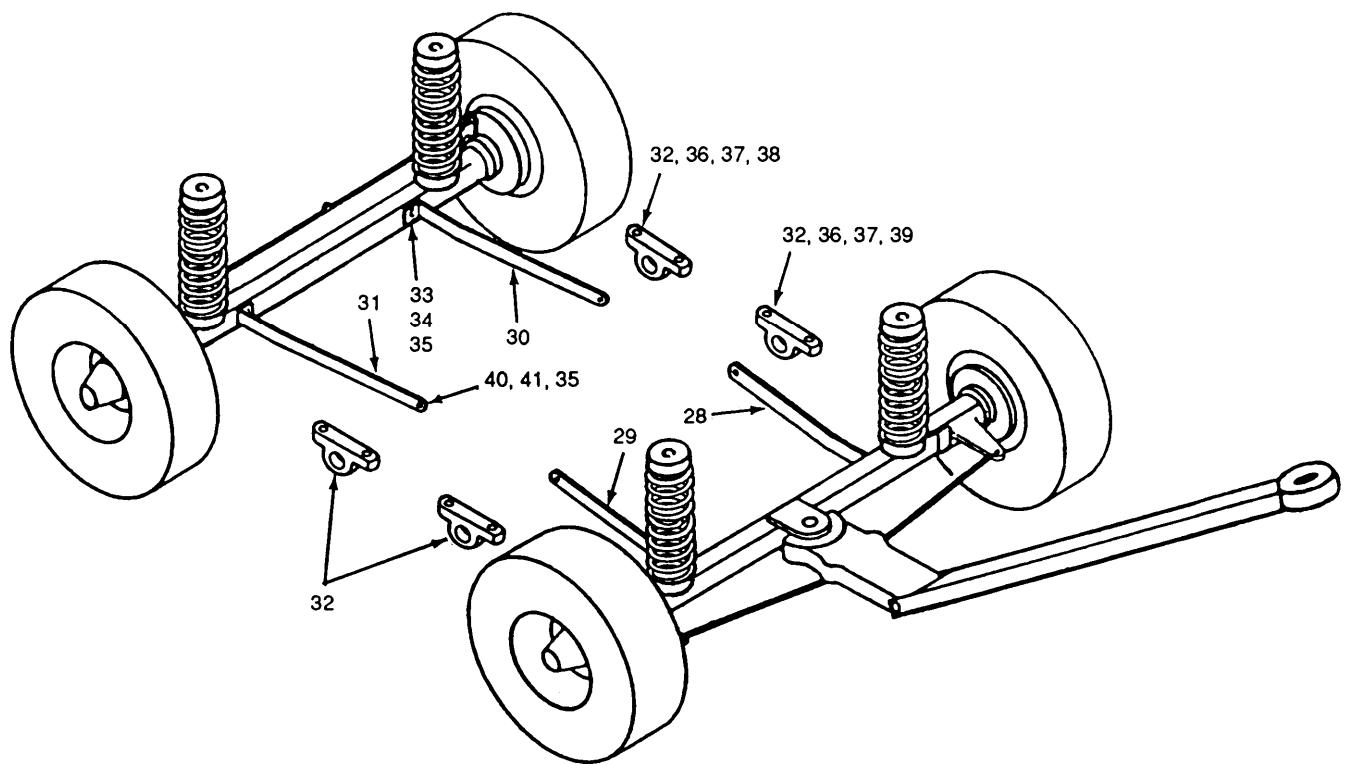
Front Axle Assembly (Sheet 2 of 2)
